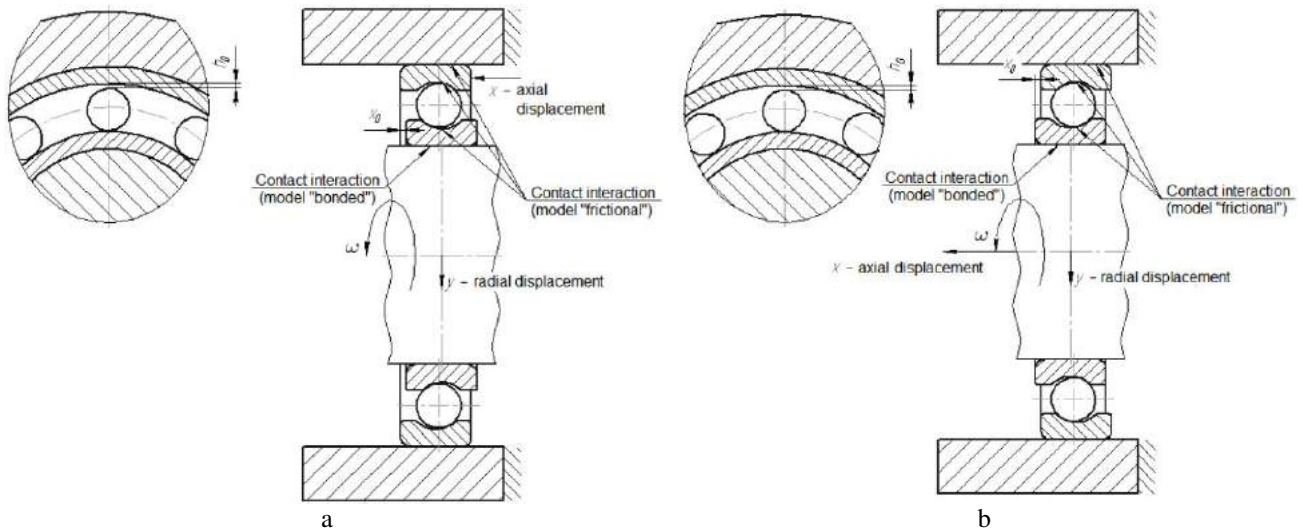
Design scheme of the bearing supports 45-216 (a) and 45-276214 (b)
